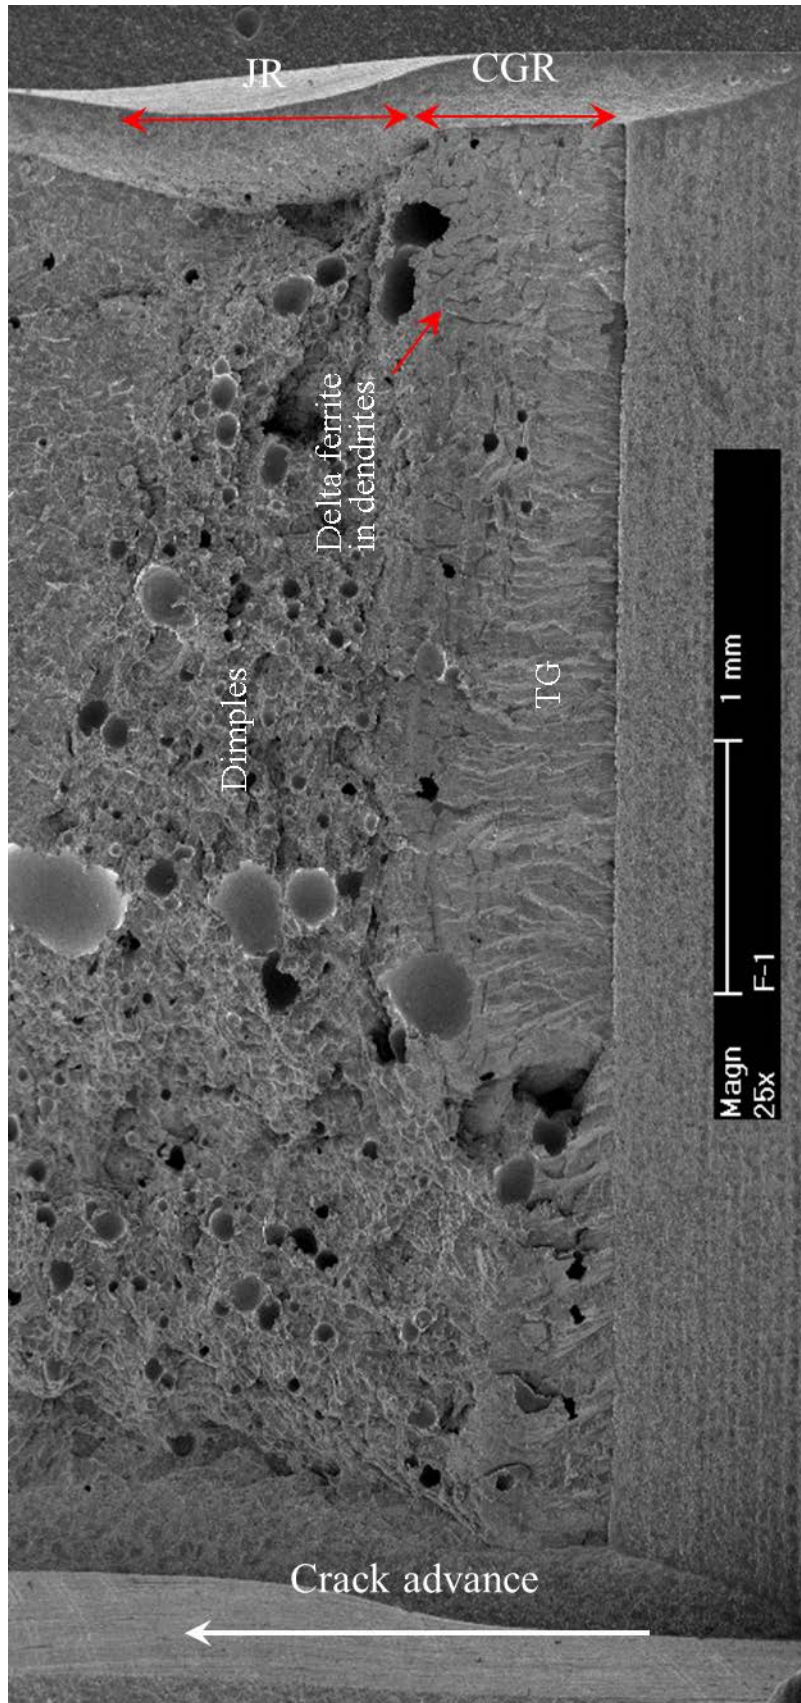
Fracture surface of specimen F-1 tested in low-DO high-purity water.
